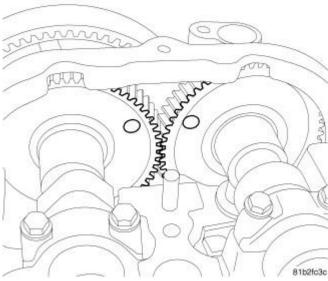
Installing Camshaft Lock Tool Courtesy of CHRYSLER LLC
